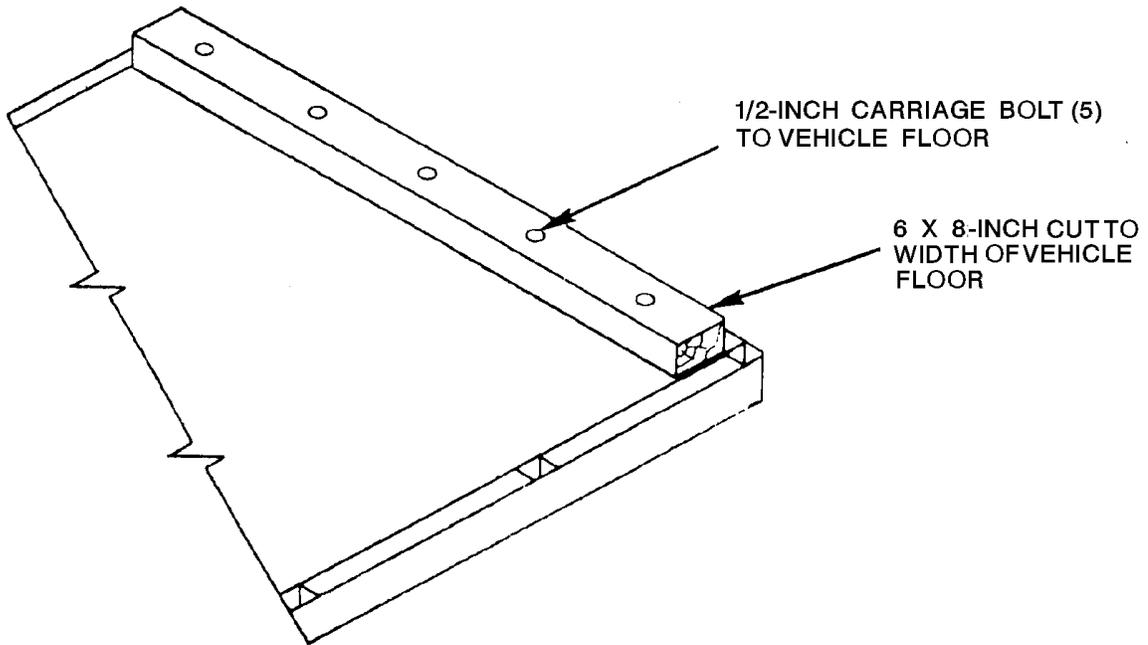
Alternate Forward Floor Blocking (Flatbed)
